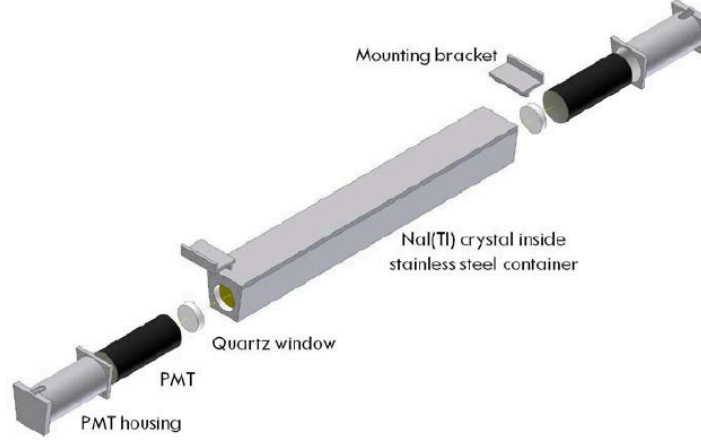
Exploded view of NaI(Tl) bar with PMTs, complete with steel encasement [93].
